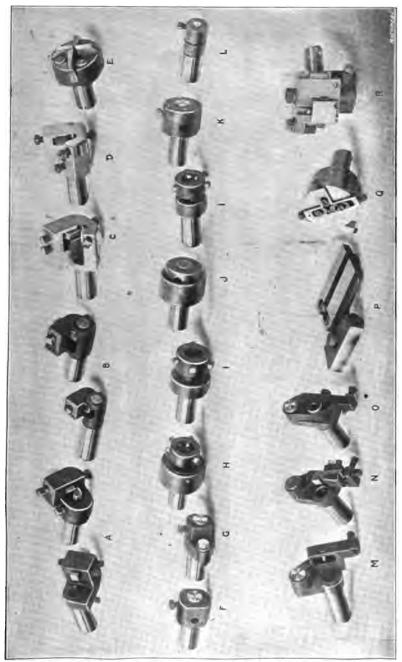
Representative Group of Standard Tools for Brown & Sharpe Automatic Screw Machines
